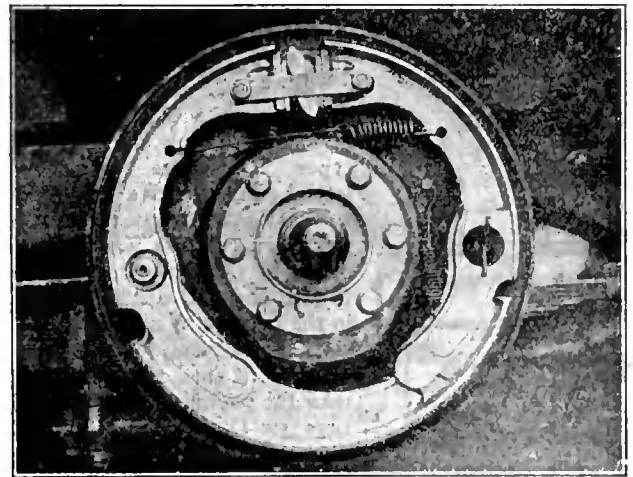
Bendix-Perrot three-shoe servo brake.
